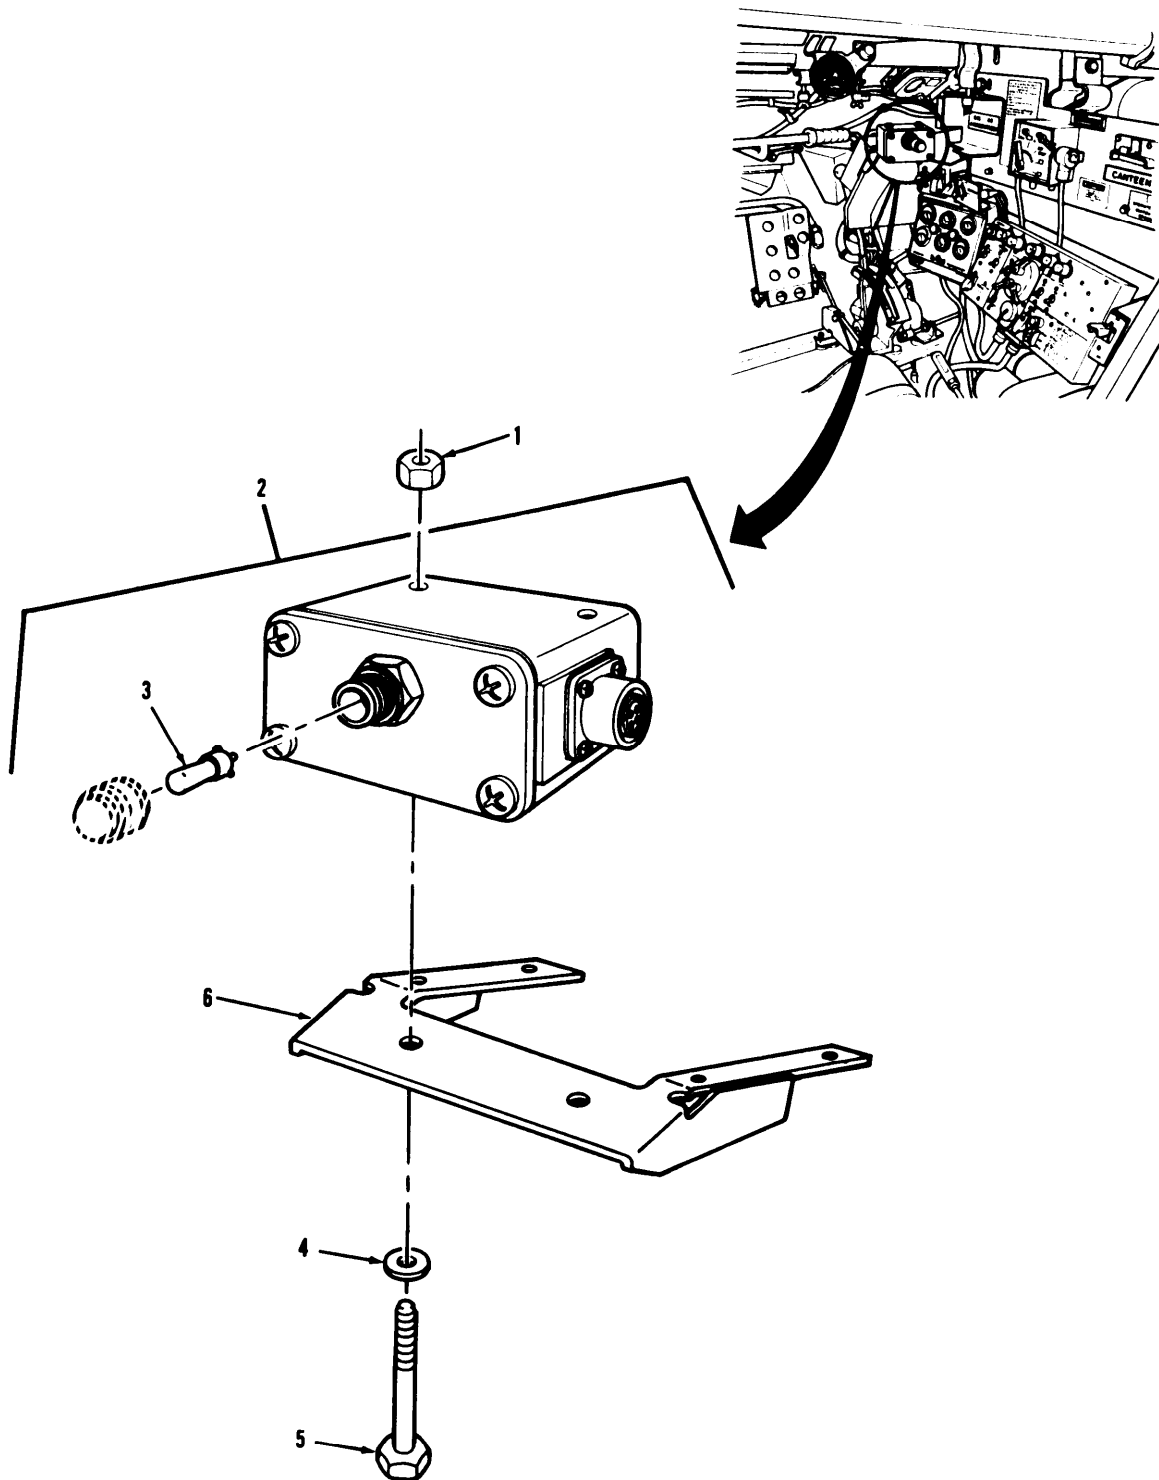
ENGINE AIR CLEANER DUST DETECTOR BOX ASSEMBLY AND RELATED PARTS (M728).
